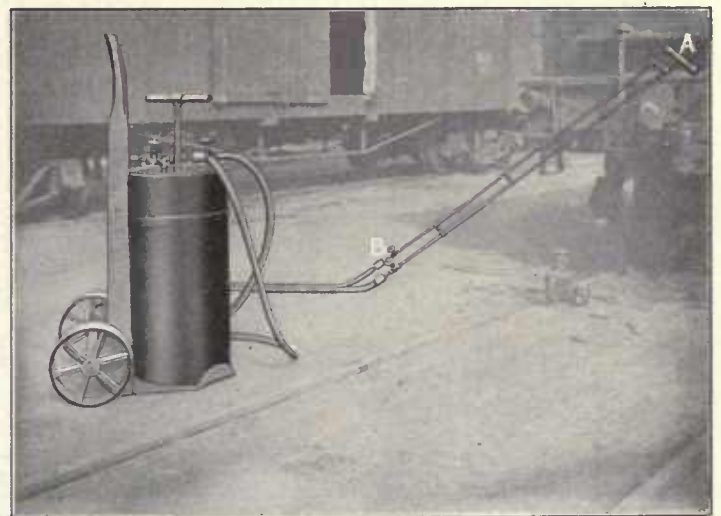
Crude Oil Torch for Heating Damaged Parts of Steel Underframe or All-Steel Cars.
